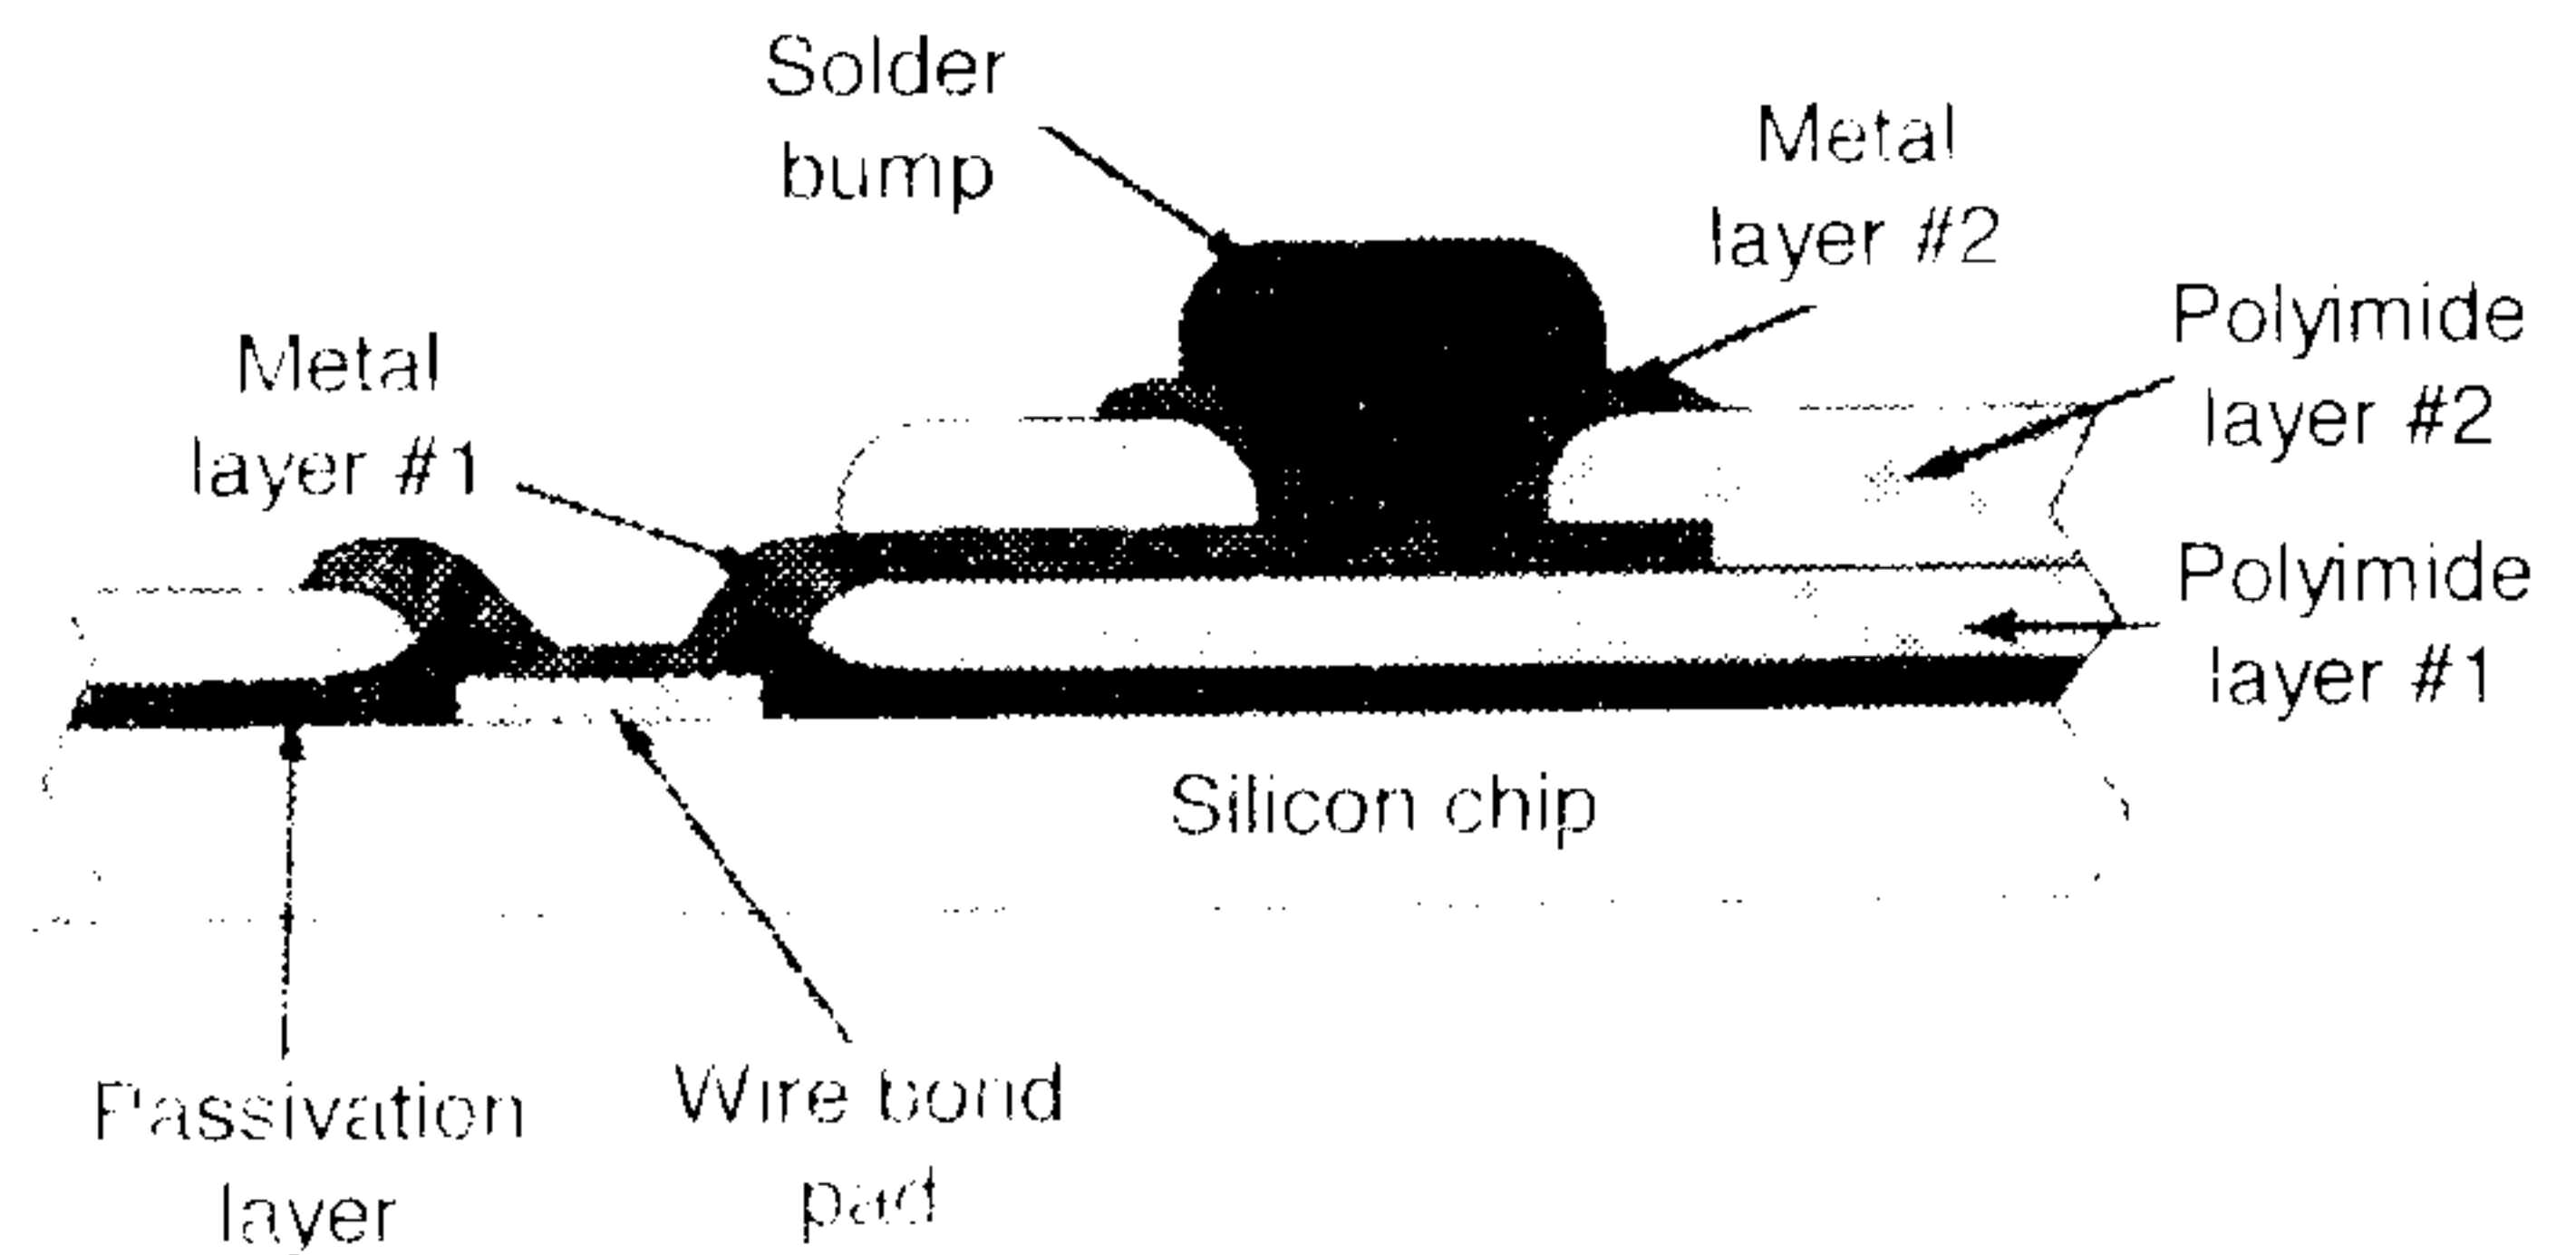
Section view of a CSP solder bump produced on the wafer before dicing.
